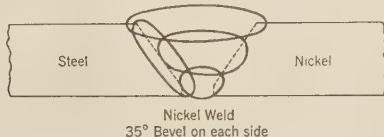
METHOD OF WELDING NICKEL PLATE TO STEEL PLATE
